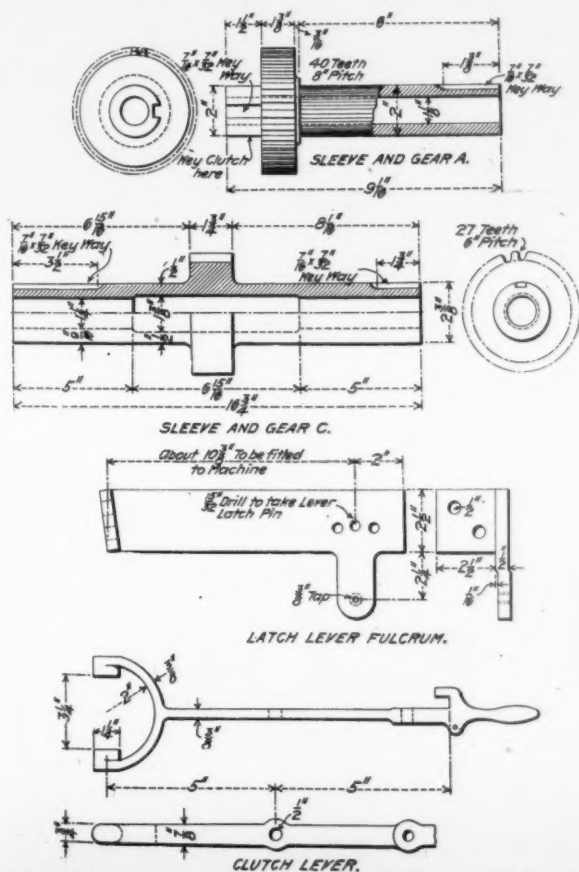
DETAILS OF THE NEW PARTS REQUIRED FOR THE NEW MOTOR DRIVE, TO FURNISH TWO CHANGES OF SPEED BY GEARING.
